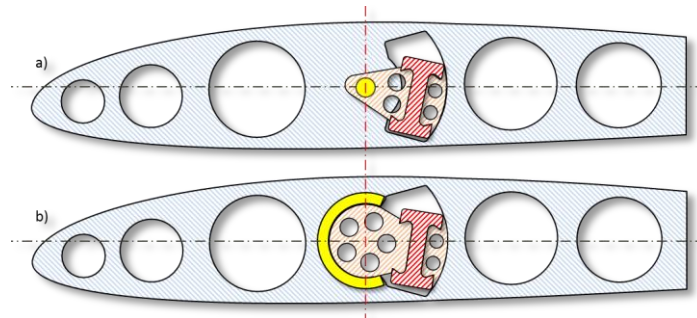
Eccentric pivot mechanism: a) pin joint b) plain bearing joint
